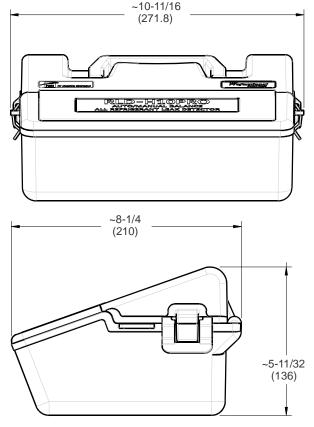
RLD-H10PRO Dimensions, in. (mm)
